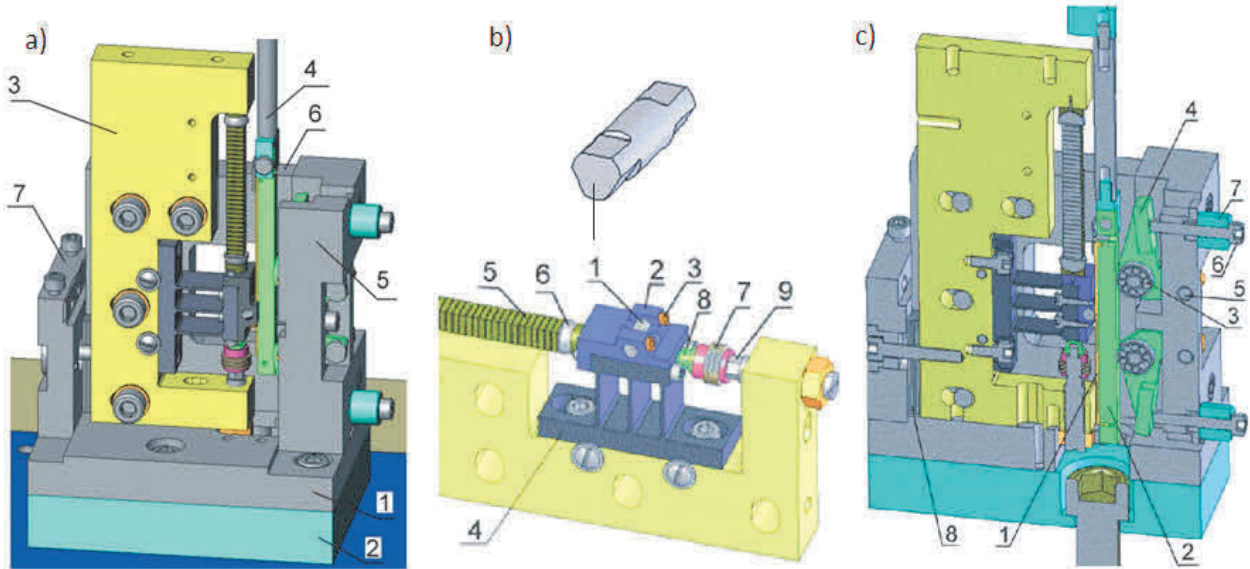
Experimental set up: a) main parts of Vib-Tester, b) vibrator unit, c) the method of deformation adjusting
